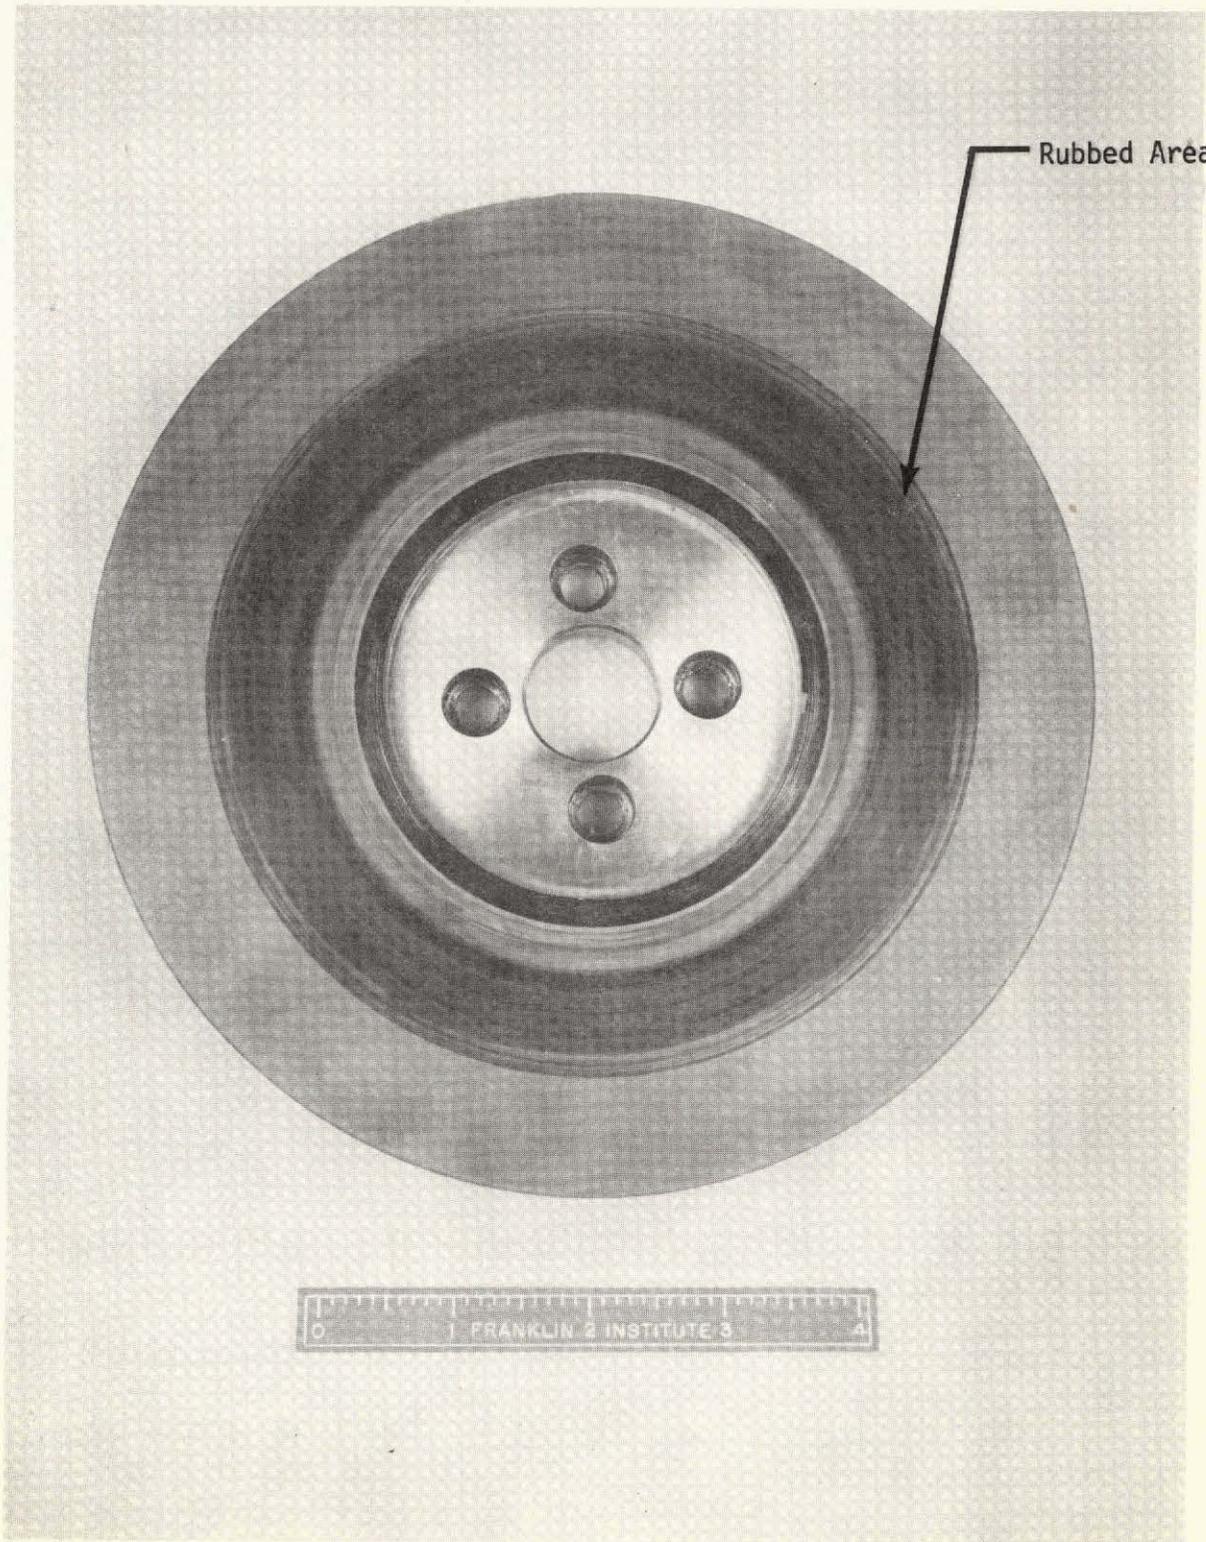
Thrust Bearing No. 3, 156N (35 lbf) Load, Failure at 35 Cycles
